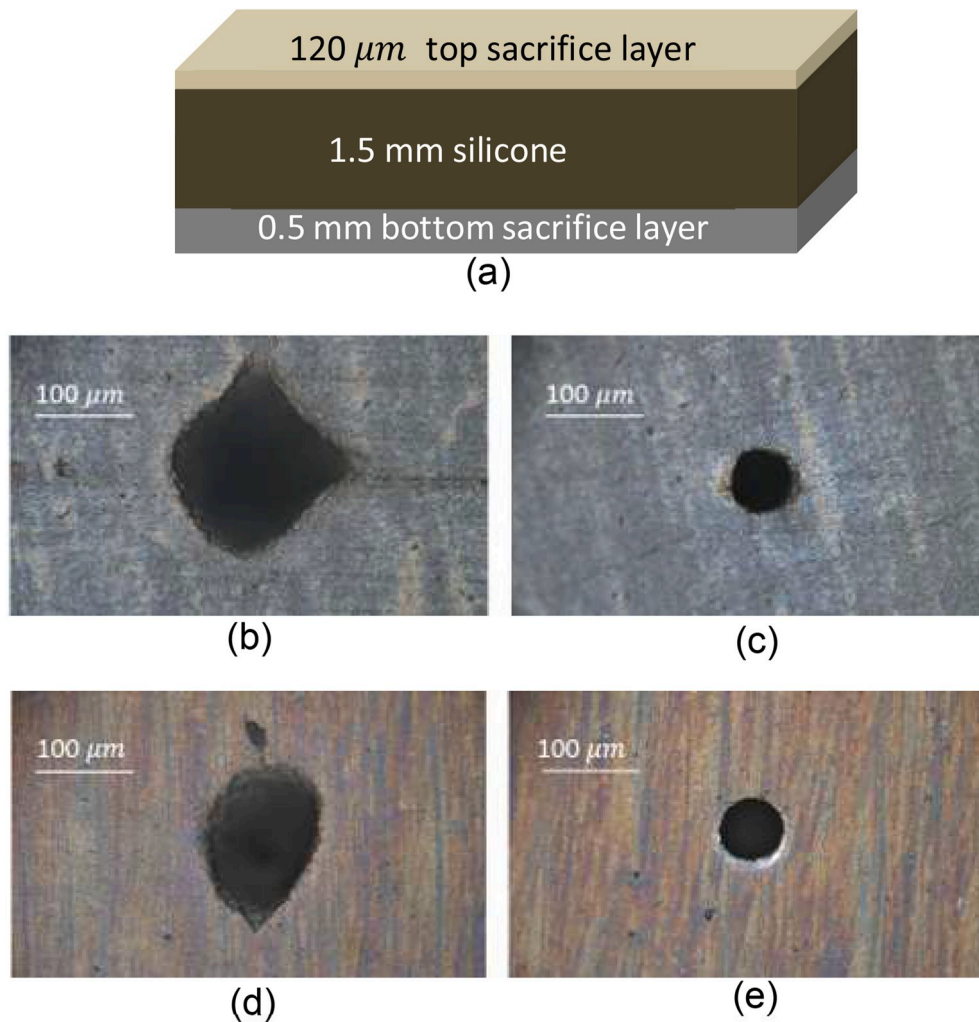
(a) The 3-layer structure for improving machining quality. The final workpiece is sandwiched between the top and bottom sacrifice layers. (b) The frontside hole opening without top sacrifice layer. (c) The frontside hole opening with top sacrifice layer. (d) The backside hole opening without bottom sacrifice layer. (e) The backside hole opening with bottom sacrifice layer.
